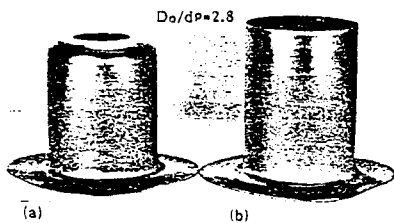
Tubes with a flange obtained by counter-pressure forming: (a) before drifting; (b) after drifting.
